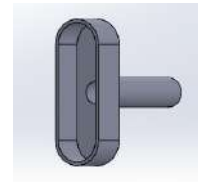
Cover of Door Lock made using Aluminium Job in CNC Lathe
